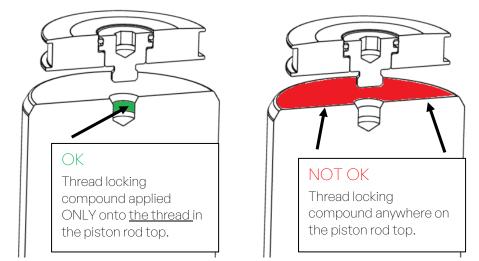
Only apply thread locking compound directly to the threads in the piston rod top.
